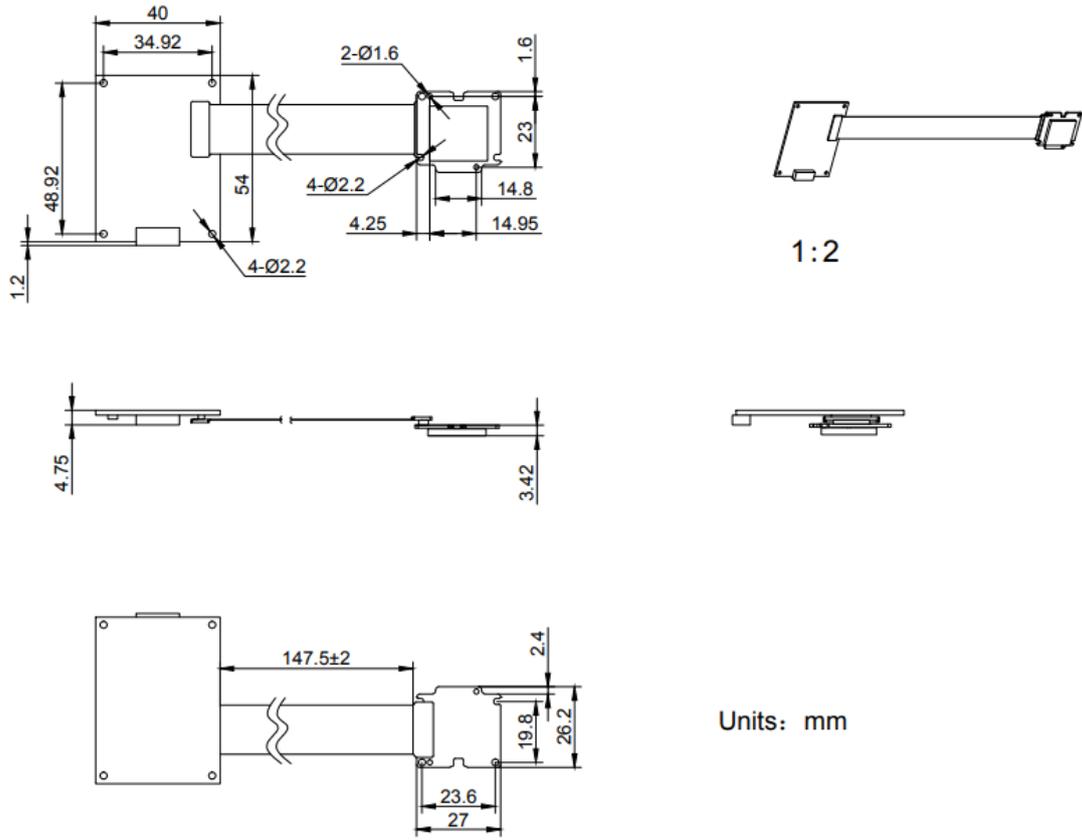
Split USB3.0 camera mechanical dimensions (No-Mount)
